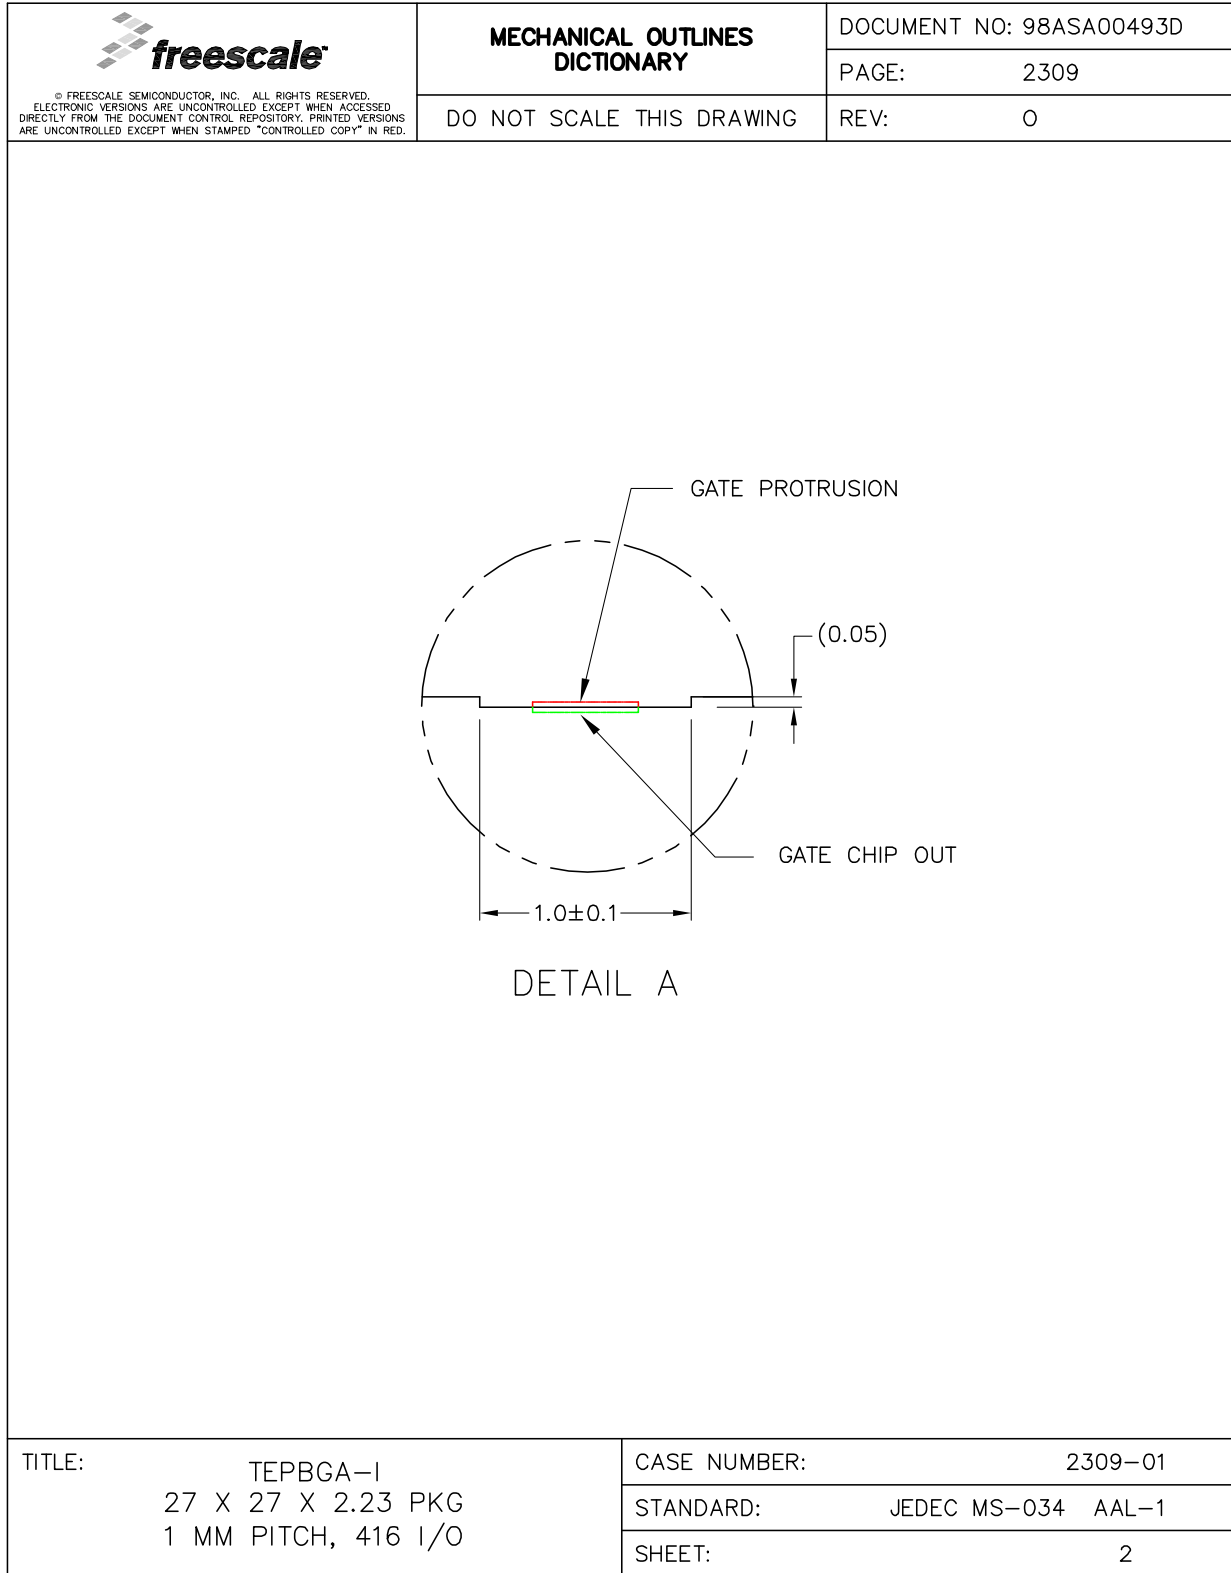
416 TEPBGA (emulation) package mechanical drawing (Sheet 2 of 3)
